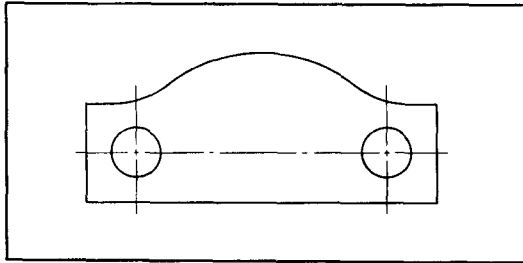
One-view drawings. These are used whenever views in more than one direction are unnecessary, for example, for parts made of thin material.
